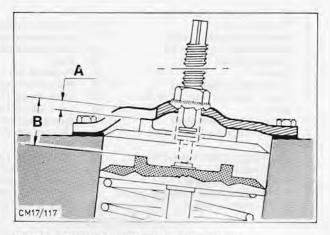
Determine stroke of rear servo piston A = 3.7 mm (0,147 in) B = 8,3 mm (0,327 in)
